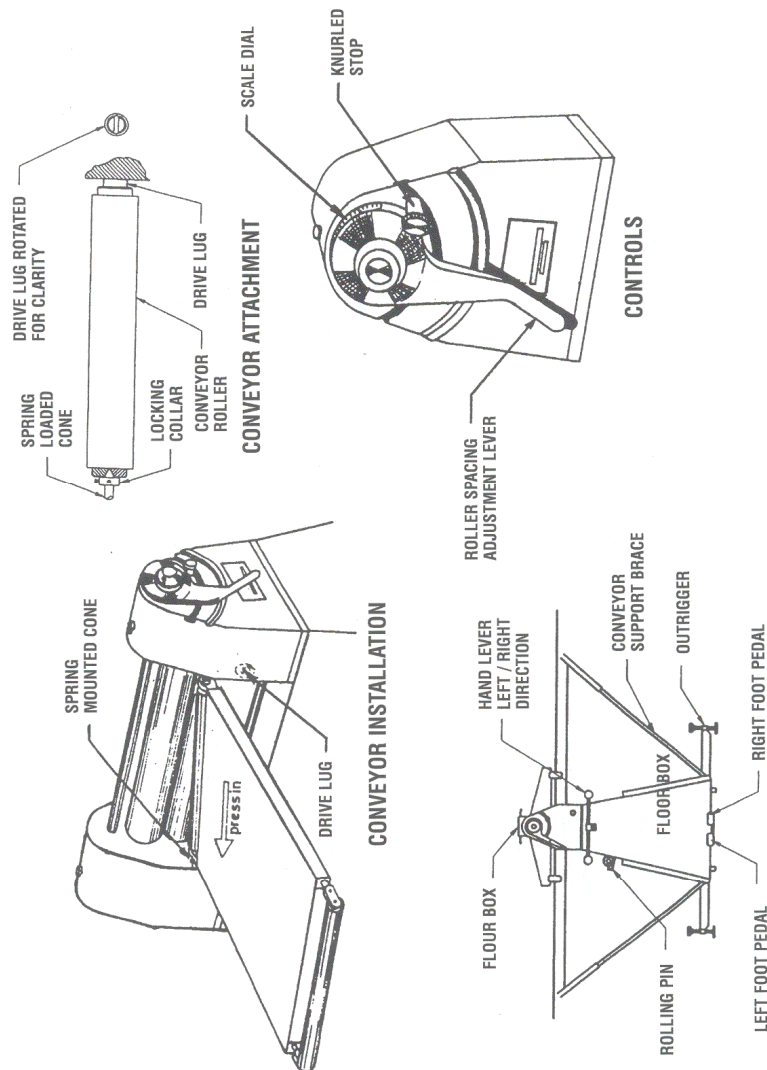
REVERSIBLE SHEETER NOMENCLATURE
